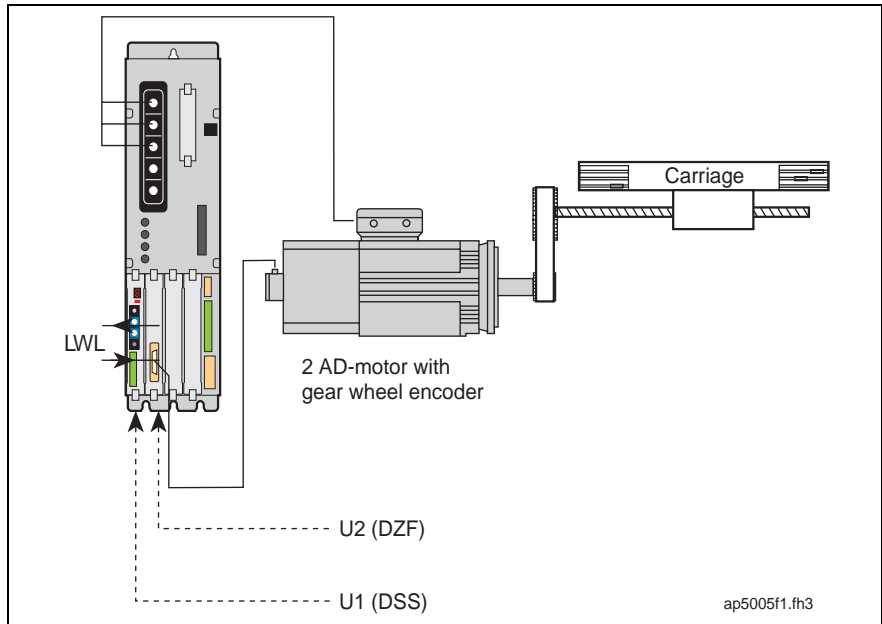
2AD motor with gear wheel encoder, connected to a DZF02.1M module
